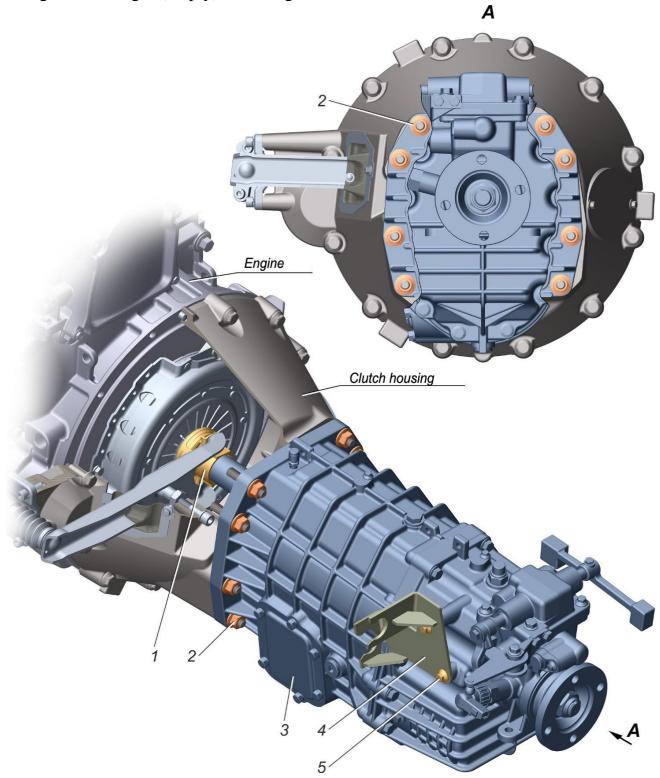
Gearbox installation to the engine: 1 – clutch release sleeve; 2 – nut; 3 – gearbox; 4 – cable bracket; 5 – bolt
